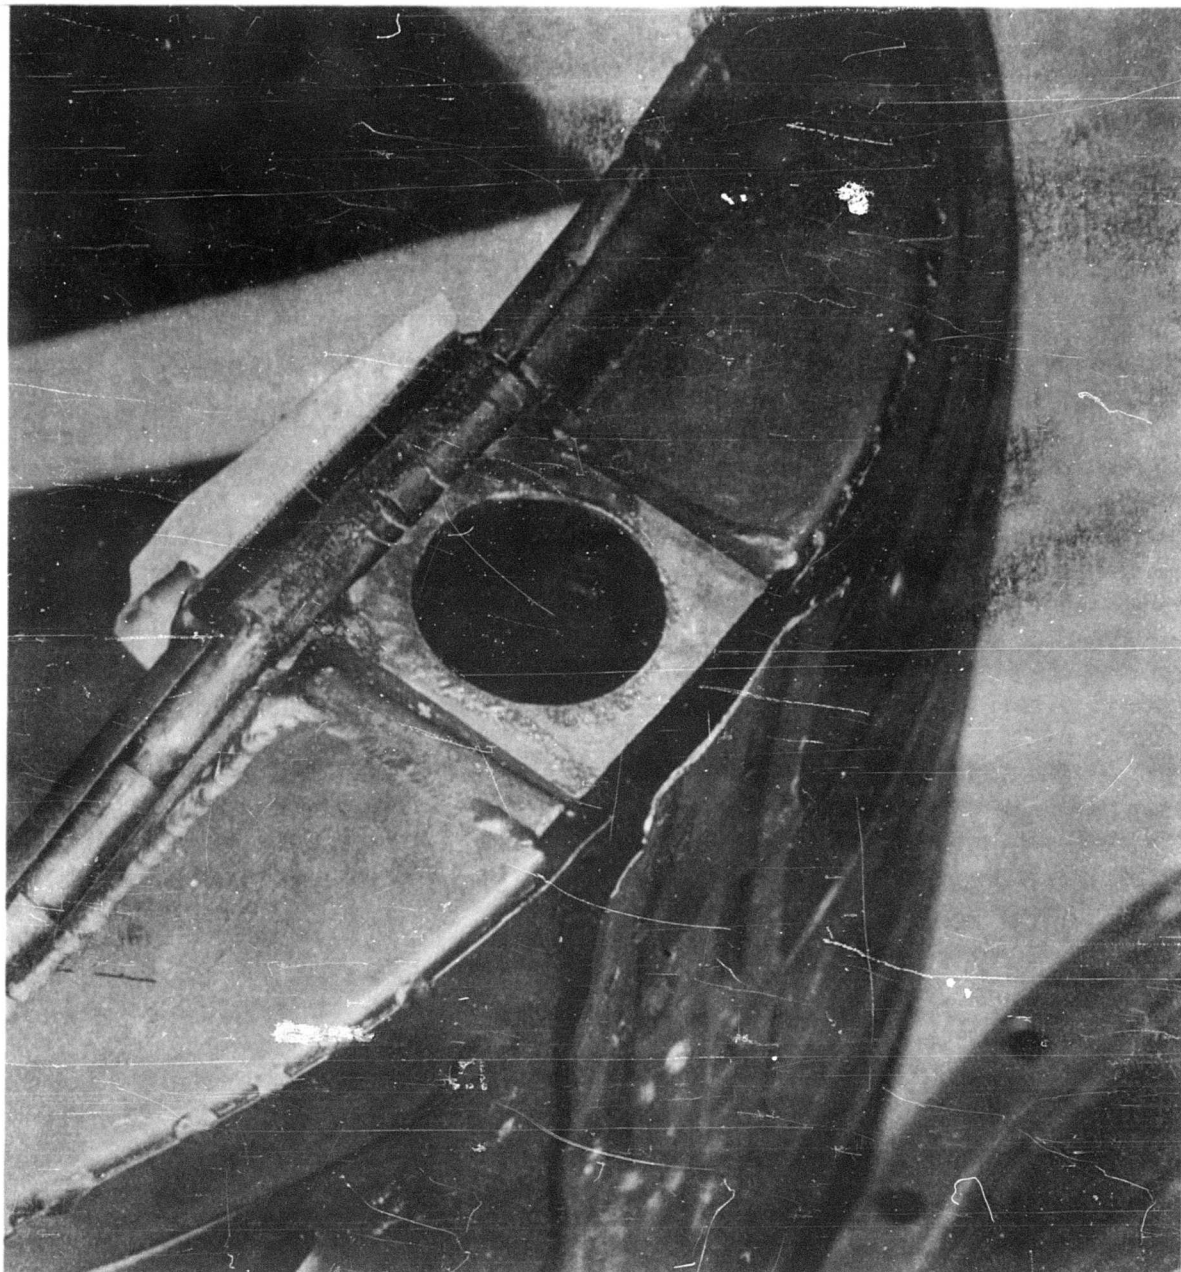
"CURVED" DIVERter VALVE DOOR, S/N001 SHOWING SEPARATED HEAT SHIELD
